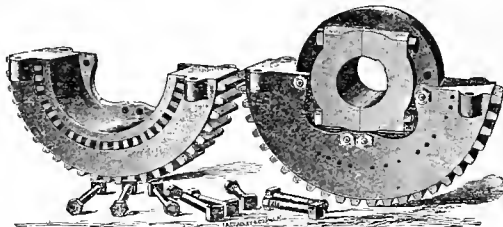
ELECTRIC RAILWAY GEARING—SPLIT AXLE GEAR—SECTION OF COGGED RIM REMOVED—WOODEN TEETH.
